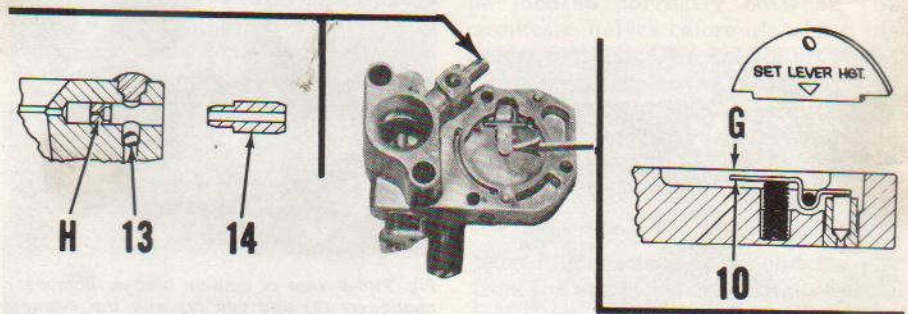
Views of carburetor showing correct installation of the high speed jet (H) and metering valve ball (13). The top of control lever (10) should be 0.020 inch below gasket surface (G) of carburetor body.
